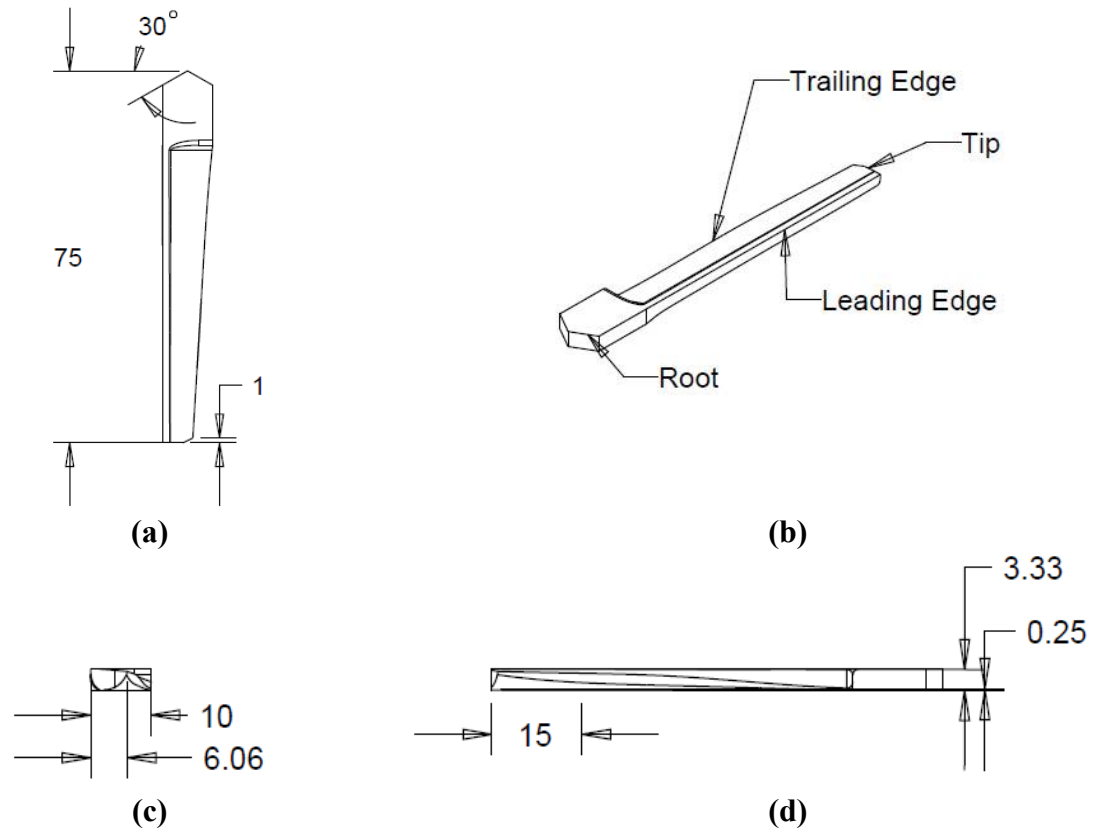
Drawing of wooden blade with measurements recorded in mm. (a) Top view (b) Isometric view (c) Front view (d) Right-side view.
